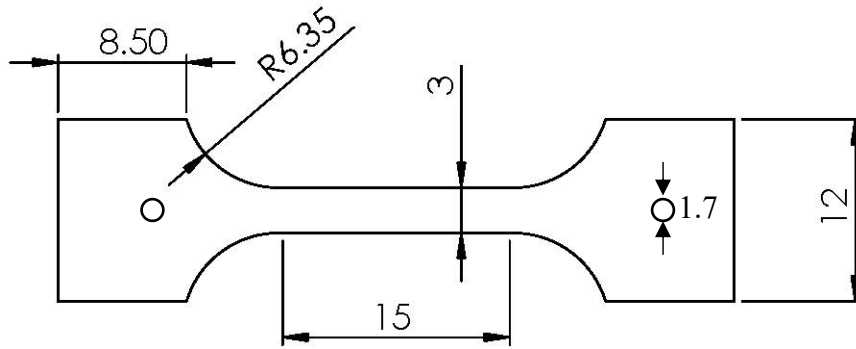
Schematic of dog bone specimen (dimensions in millimeters).
